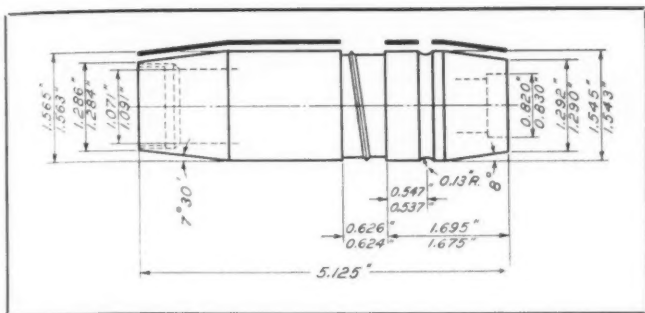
Dimensions of 40-millimeter Shell Finished by Centerless Grinding the Profile
